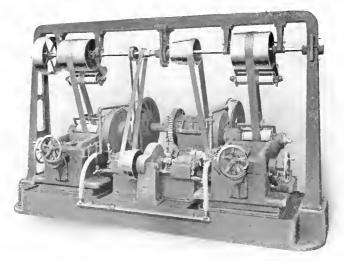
Car Wheel Grinder. Norton Grinding Co.
